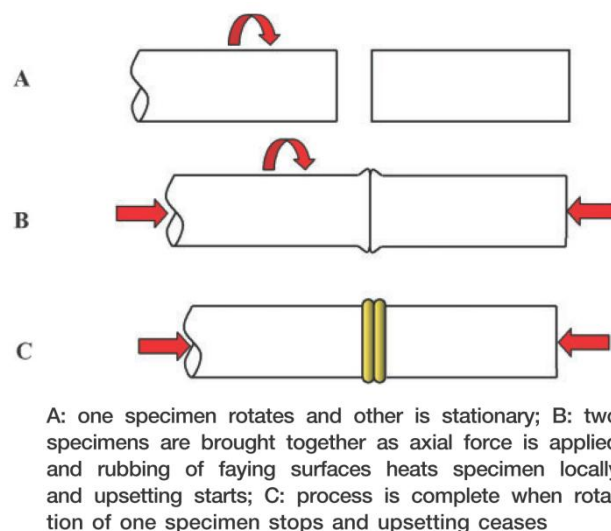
Basic steps of the rotational friction welding process [3]
